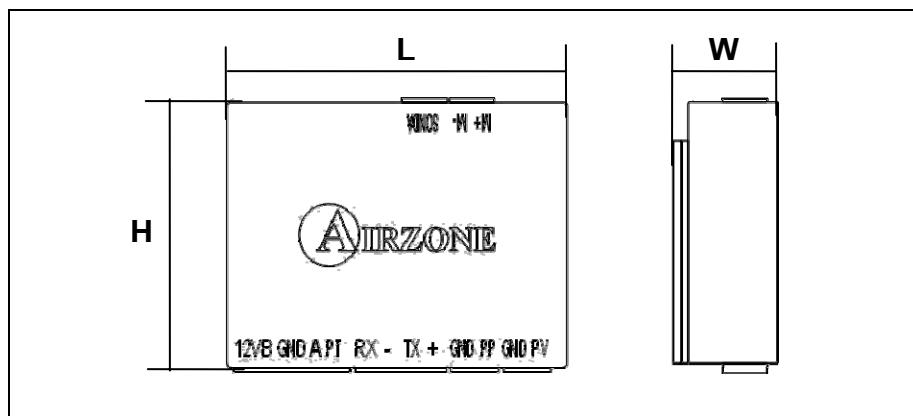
Zone module Dimensions (Refer to table in Section 6.5.)
